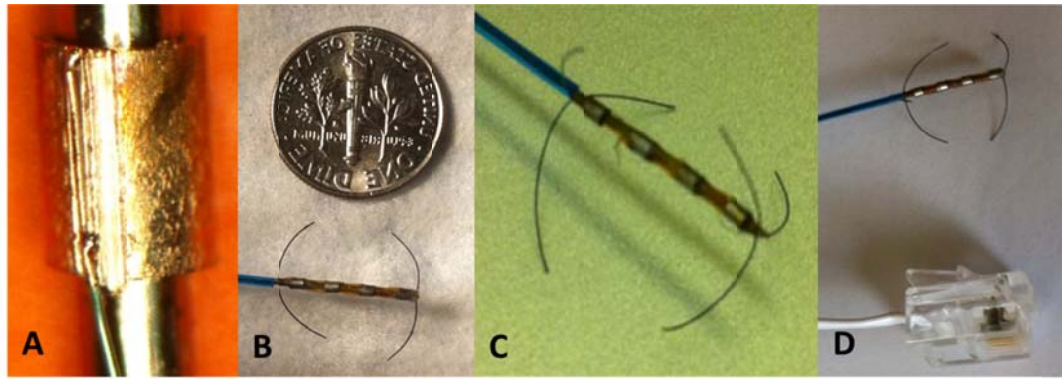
The laser welded electrode ring (A) and the finished assembly (B-D). The standard telephone jack for connection to the breakout box can be seen in D.
